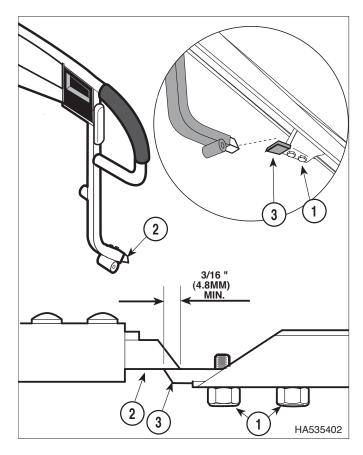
750N and 750W Siderail Latch Adjustment
